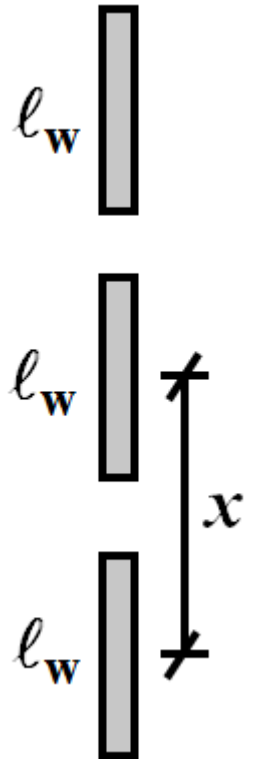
Intermittent Flange-To-Web Weld.
